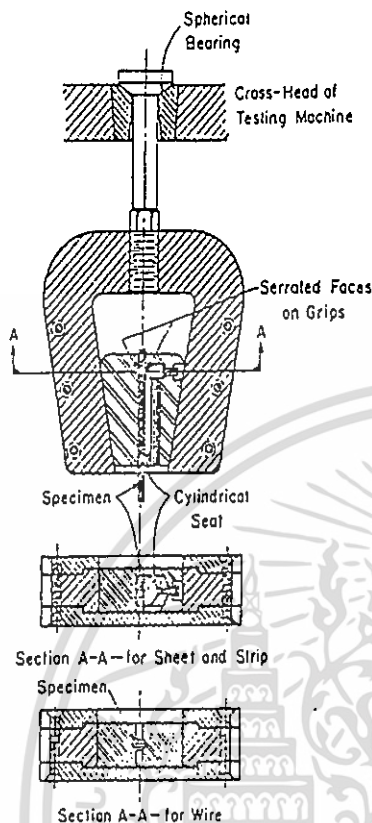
Gripping Devices for Sheet and Wire Specimens
